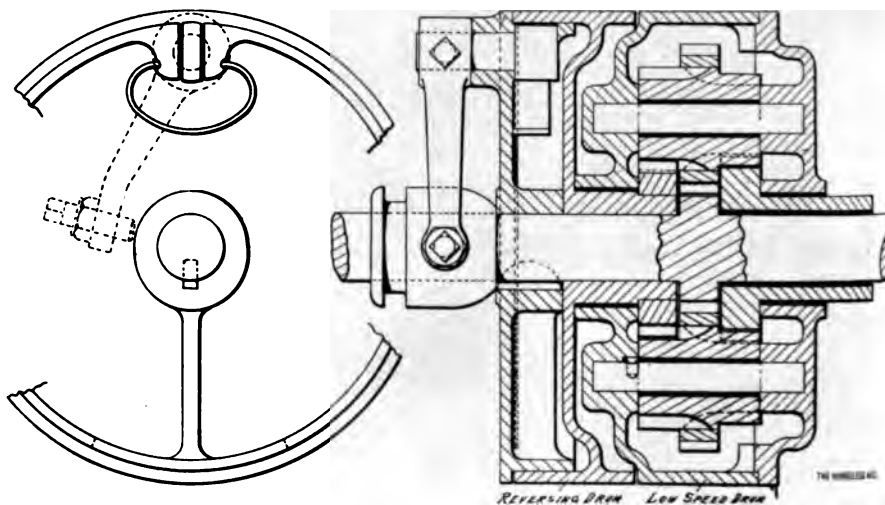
SECTION OF CHANGE SPEED GEAR.
